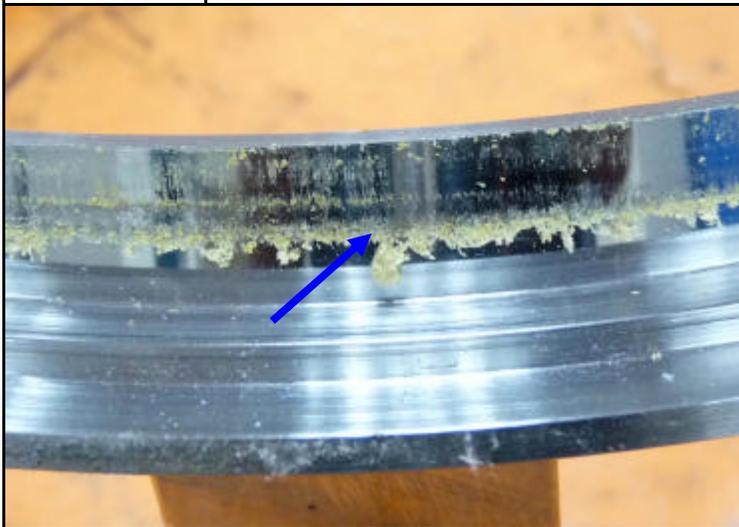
shows after cleaning of the inboard carrier, wear marking is visible on the surface of the inboard carrier where the balance diameter polymer ring seals. This component can be requires recoating.
